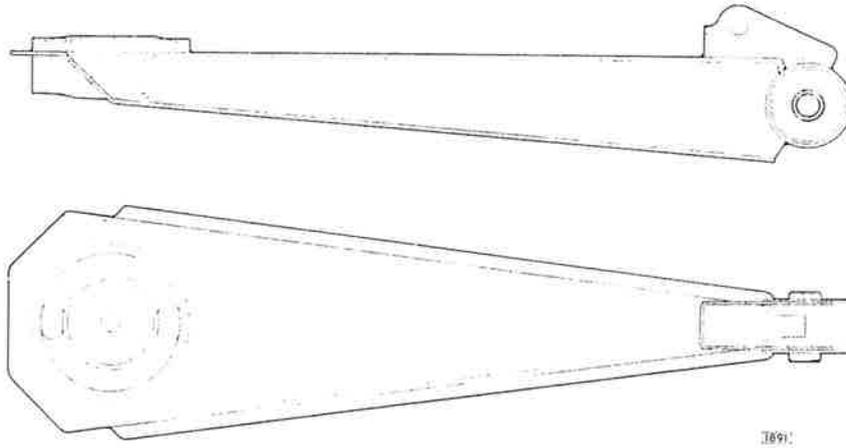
Showing the position of the mounting rubbers in the radius arm
